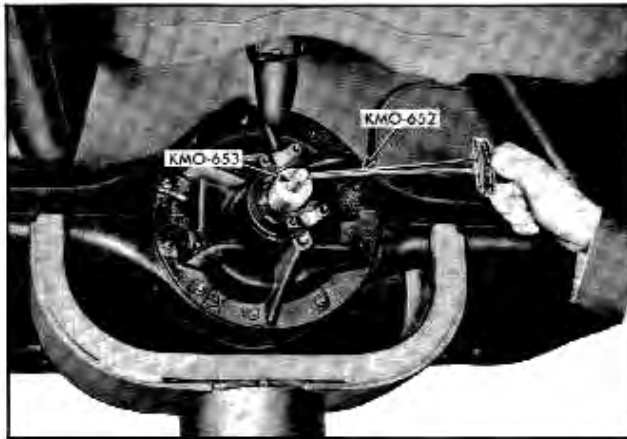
Checking Pinion Bearing Preload With Torque Wrench KMO 652
